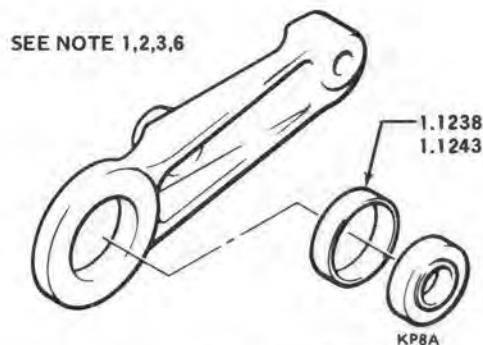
Bearing replacement (Sheet 3 of 7)
